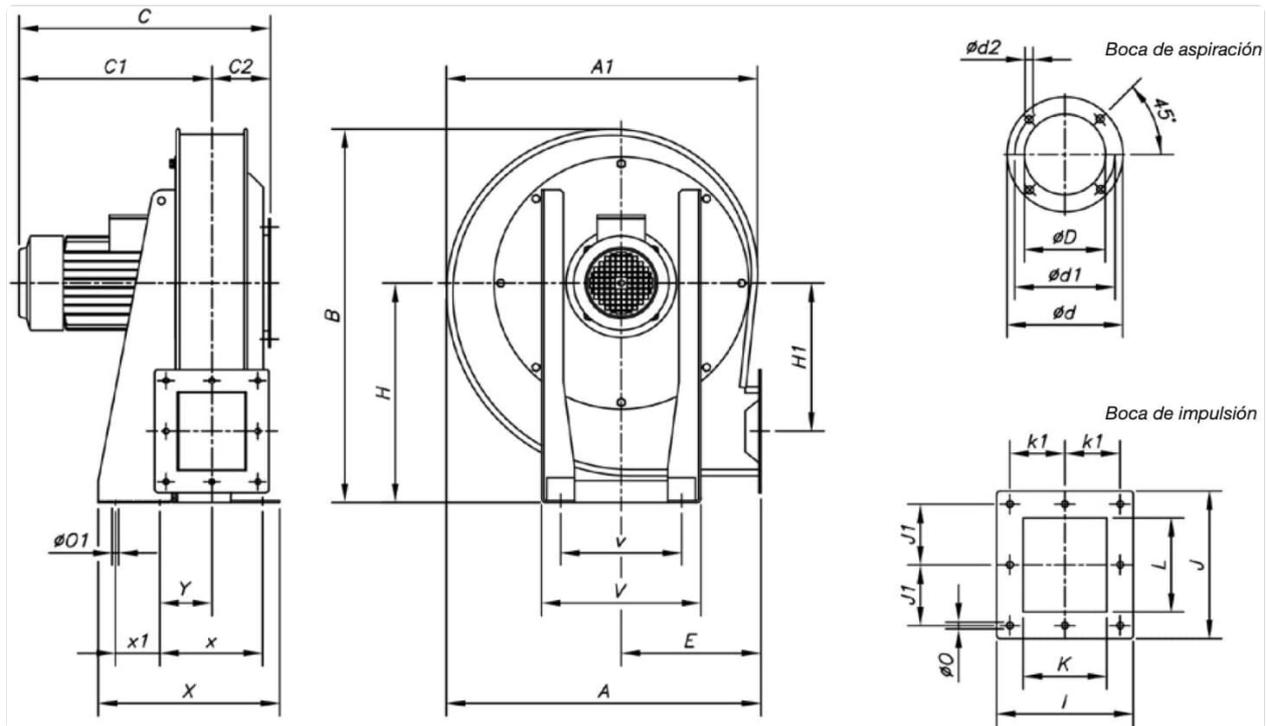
Technical drawing showing detailed dimensions and aspiration/impulsion ports of the Sodeca CAM-545-2T-4 fan.
